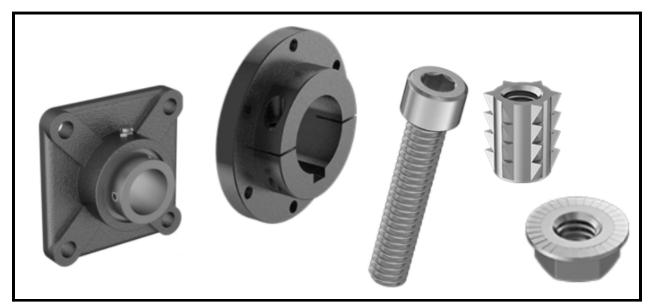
From left to right (Mounted Ball Bearing with Four Bolt Flange, Flange Mount Shaft Collar, Zinc-Plated Alloy Steel Socket Head Screw, Barbed Insert for Soft Materials, Steel Serrated Flange Lock Nut). [4]
